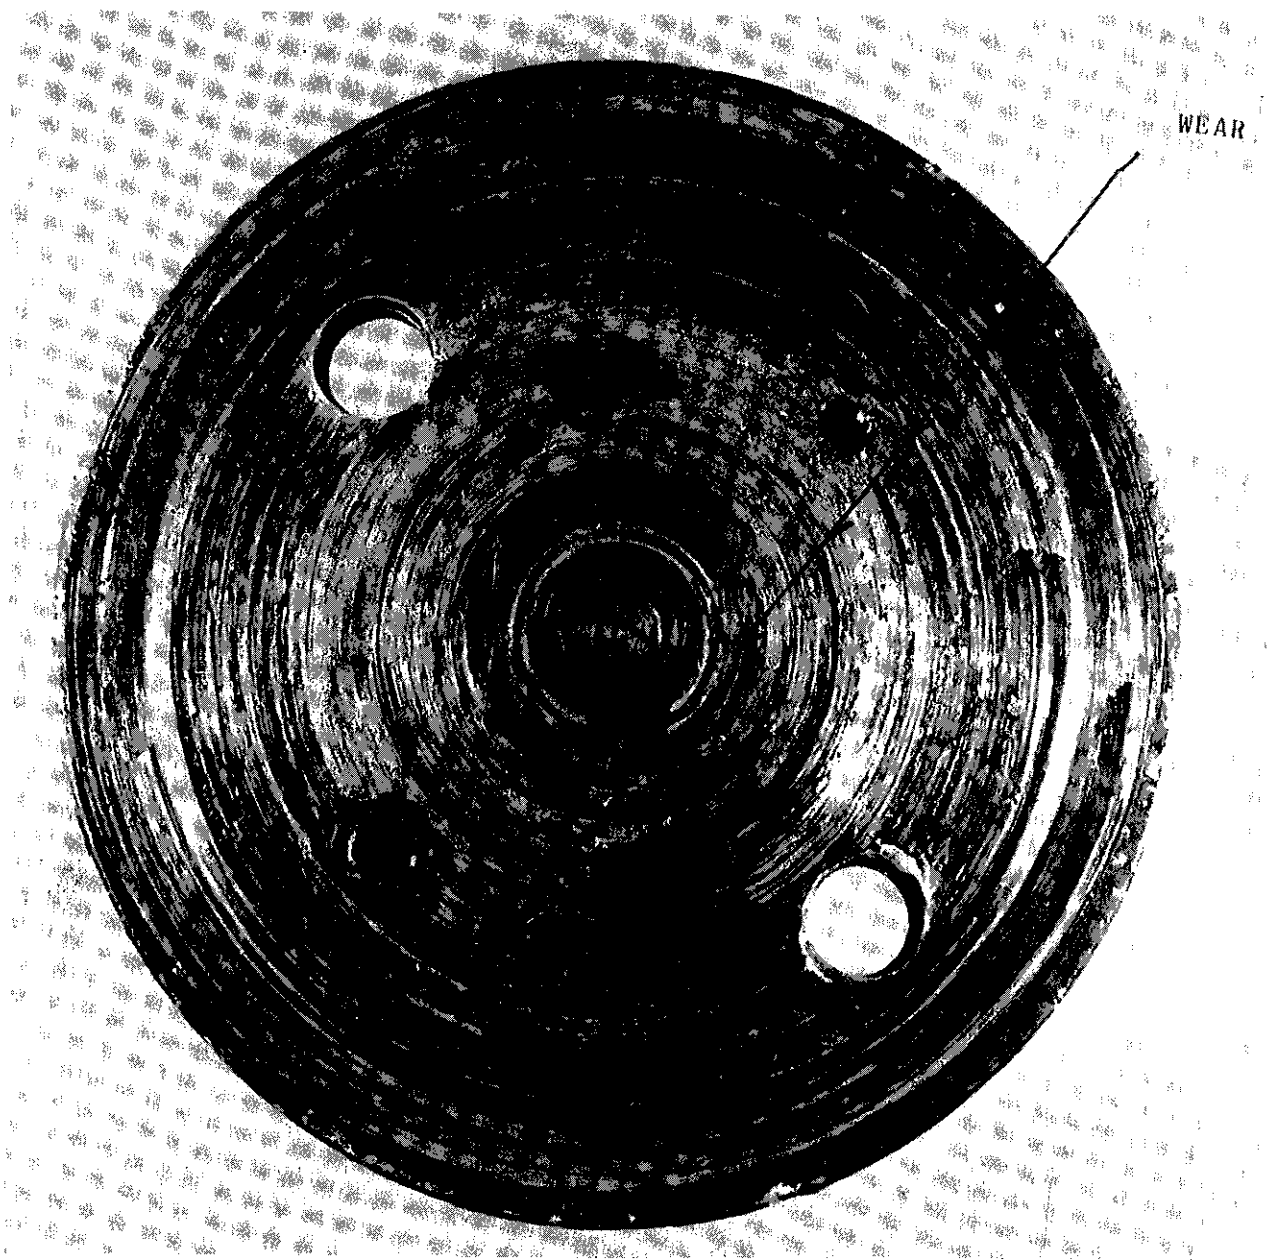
D.—Pinion Bearing End Cover Showing Excessive Wear from Contacting
